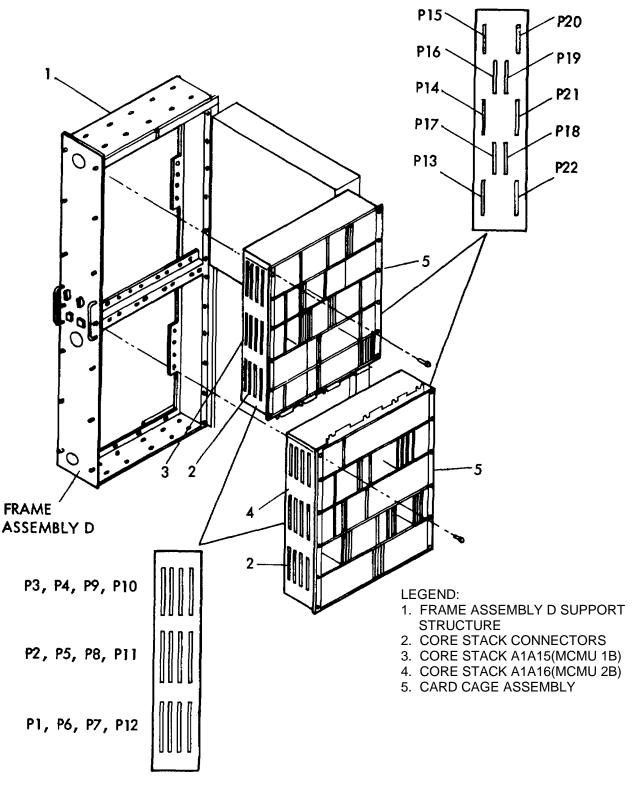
MCMU Card Cage/Core Stack A1A15 and A1A16) Assembly Removal and Replacement.
